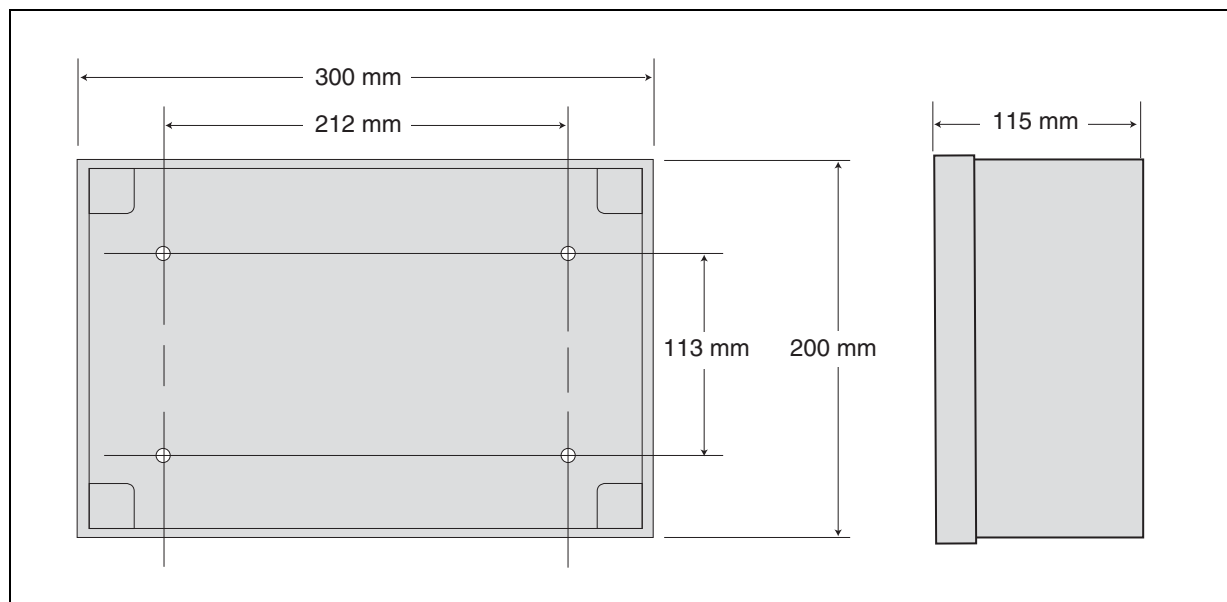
TLS Terminal Box – Overall And Fixing Dimensions
